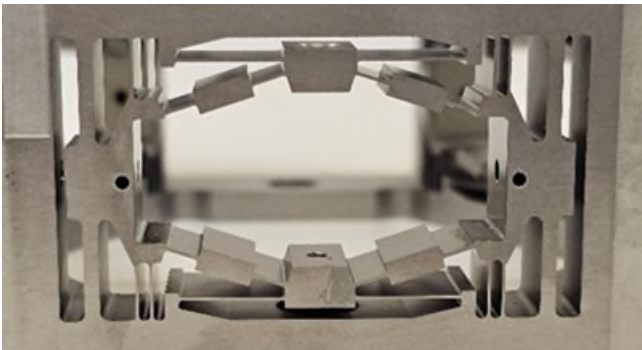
A “scissor jack” flexure arrangement demonstrating many of the design concepts discussed. This is part of an opto-mechanical mechanism originally designed for a space interferometer. It was wired out of a single piece of titanium. The flexure arrangement shown is approximately 50-mm wide.
